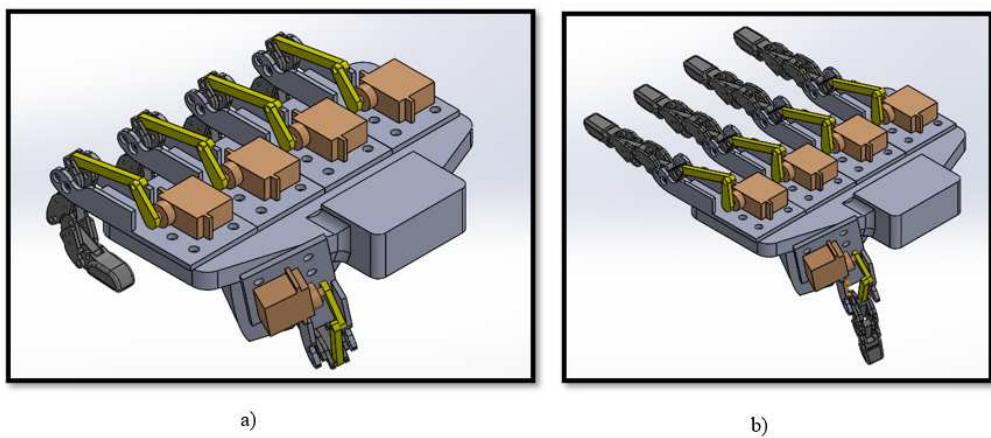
MyHand assembly grasping (flexion) and opening (extension) top view.
